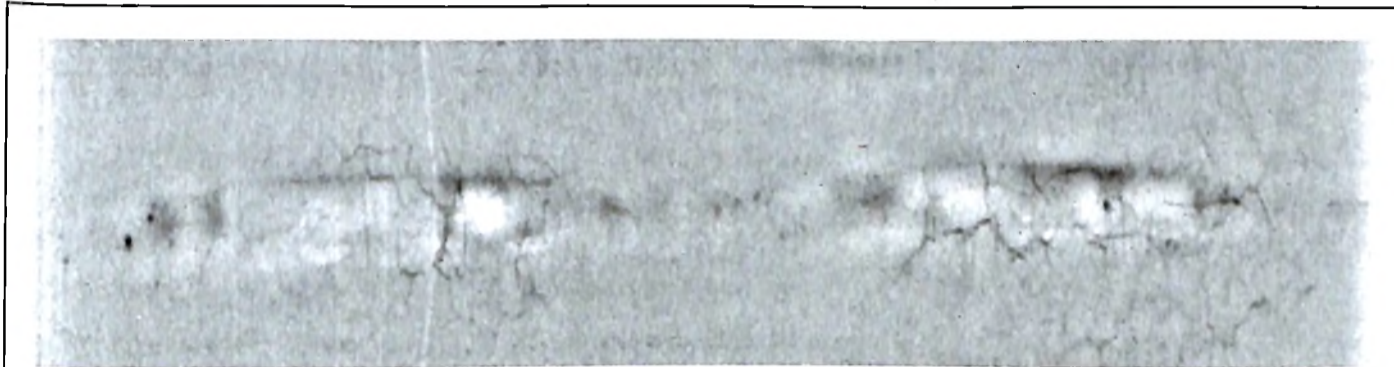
Processed Radiographic Image acquired using Flat Panel Detector of Stainless Steel Weld Pad. A 80 micron wire penetrameter can be seen. Note the sharp radiographic contrast and good detail visibility.
